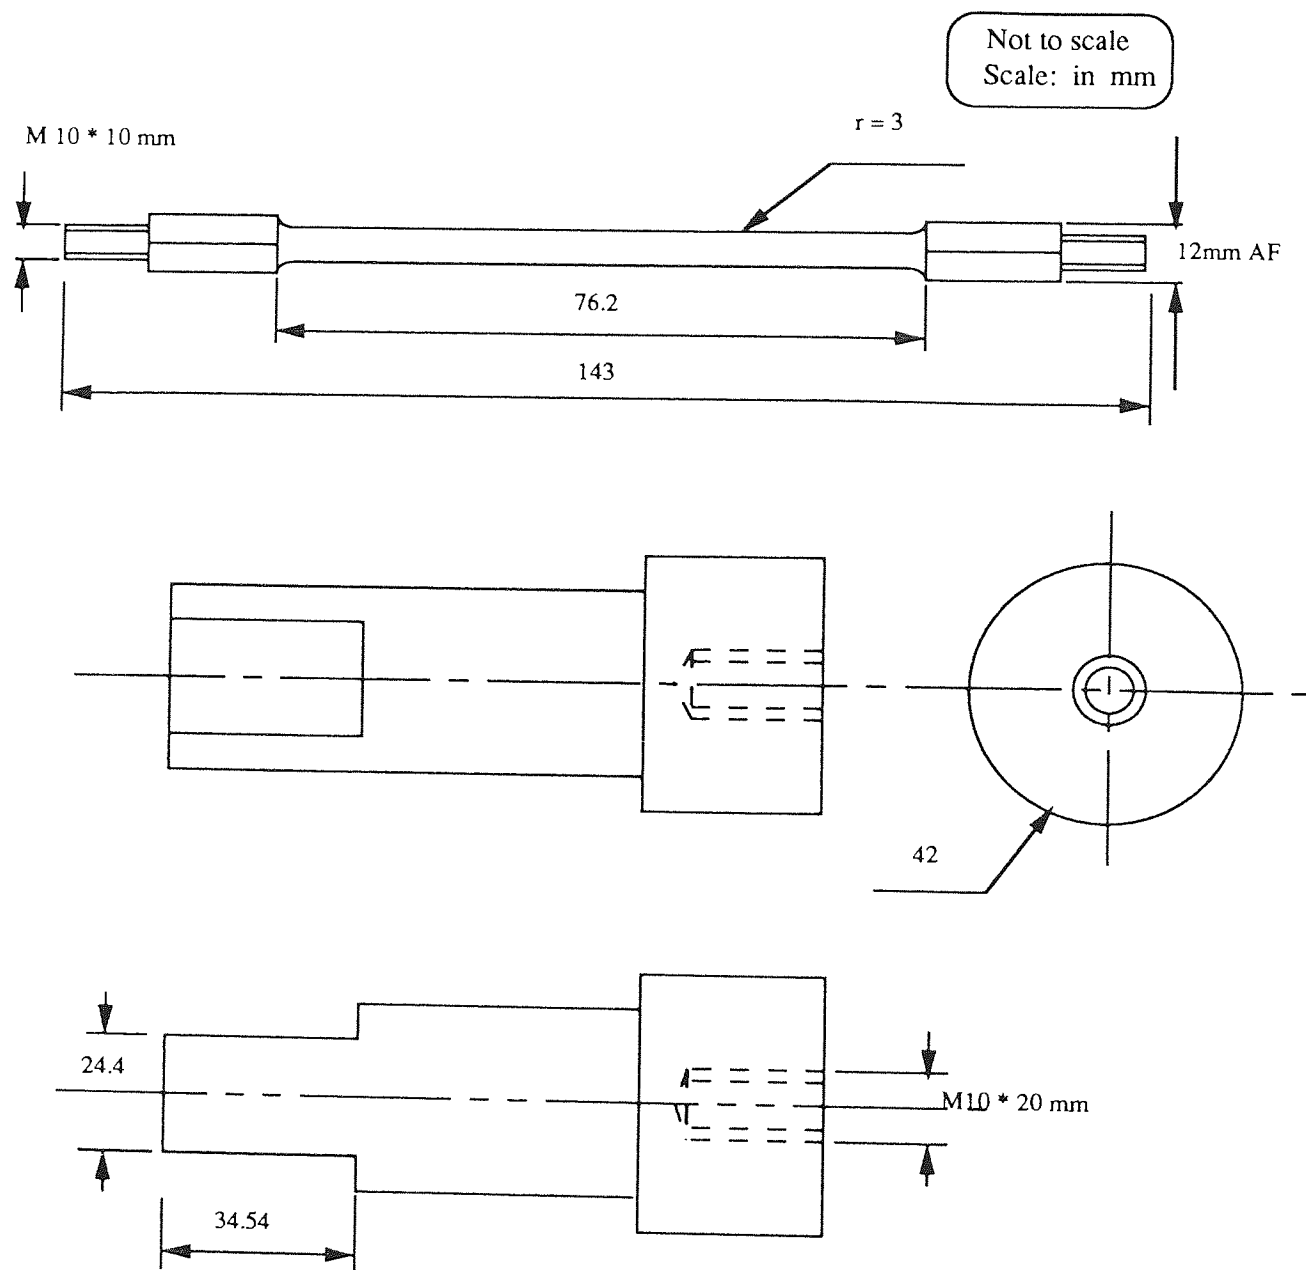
Drawing of specimen and clamps used in torsion testing
